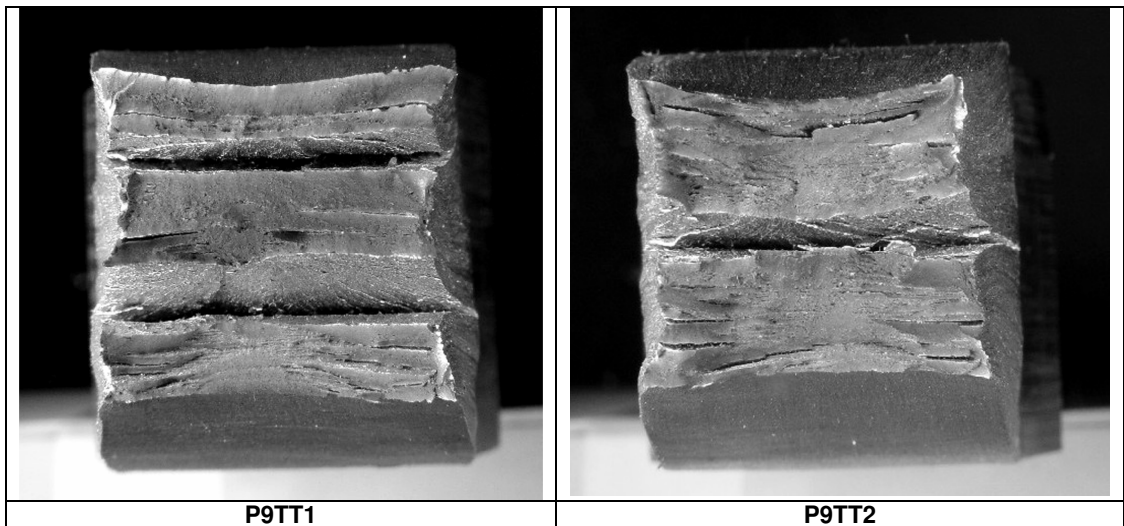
Fractographs of P9TT1 and P9TT2 specimens.
